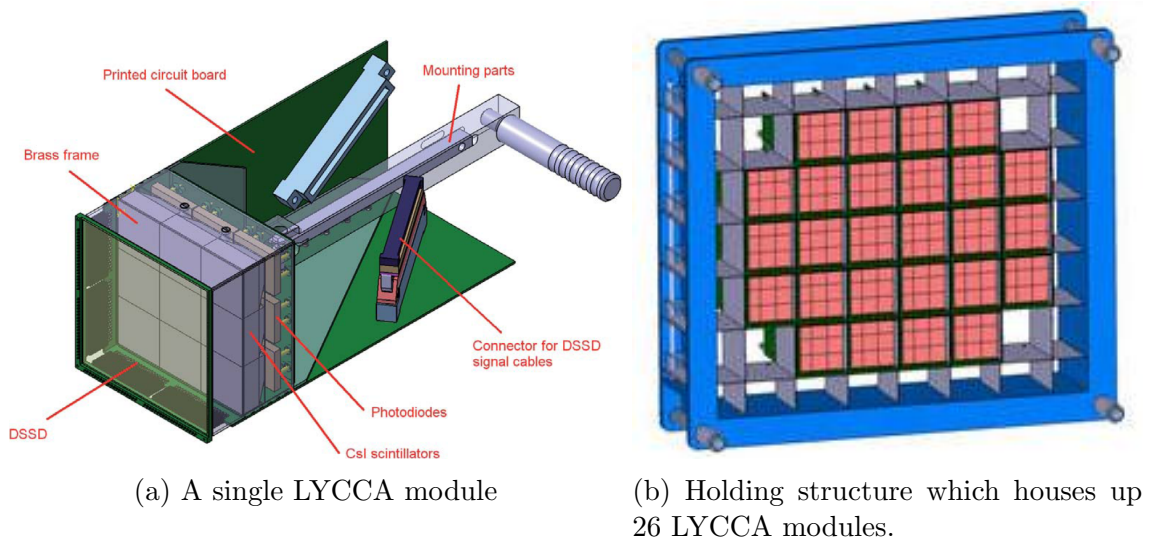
Technical drawings of (a) a single LYCCA module, which consists of a DSSSD mounted directly in front of nine CsI crystals, read out by photodiodes [62], and (b) the holding structure, which houses up to 26 LYCCA modules.
